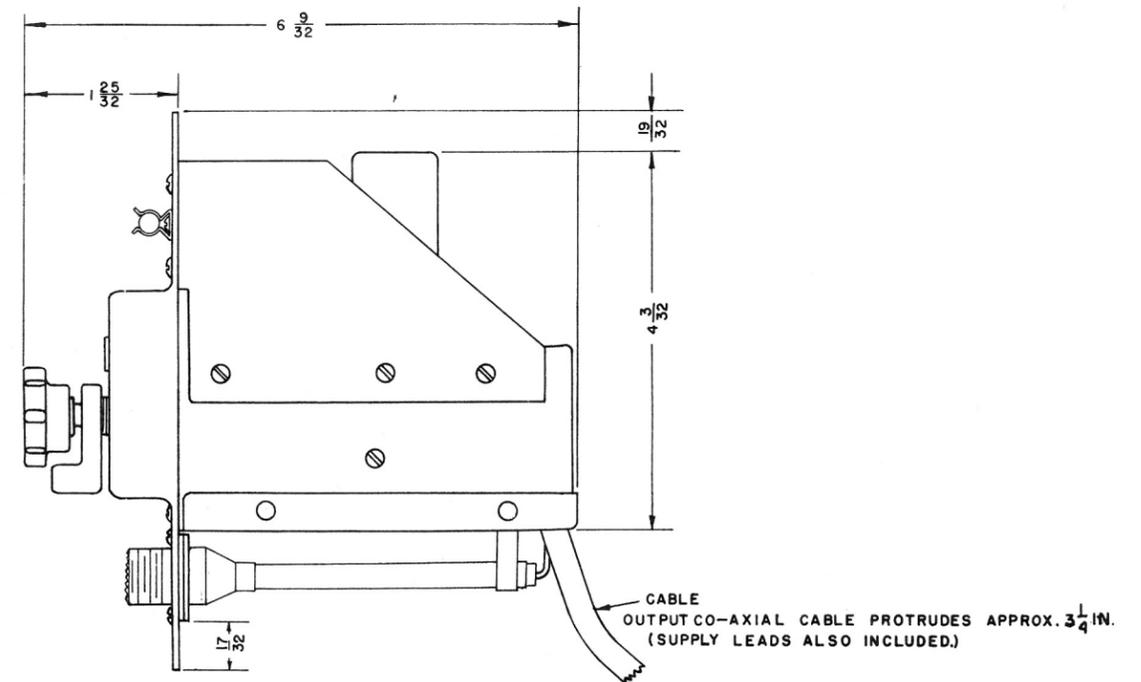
R-F to I-F Converter Navy Type CFN-46ACW Dimensional Outline Drawing
